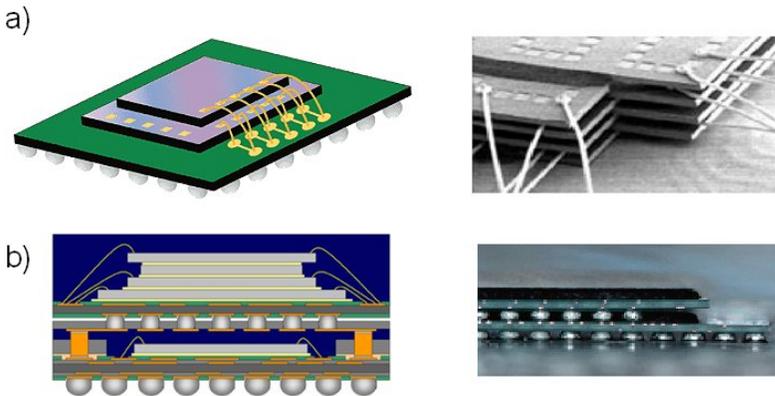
(a) Die stacking and (b) package stacking (Courtesy of Dowhan L. [5])
